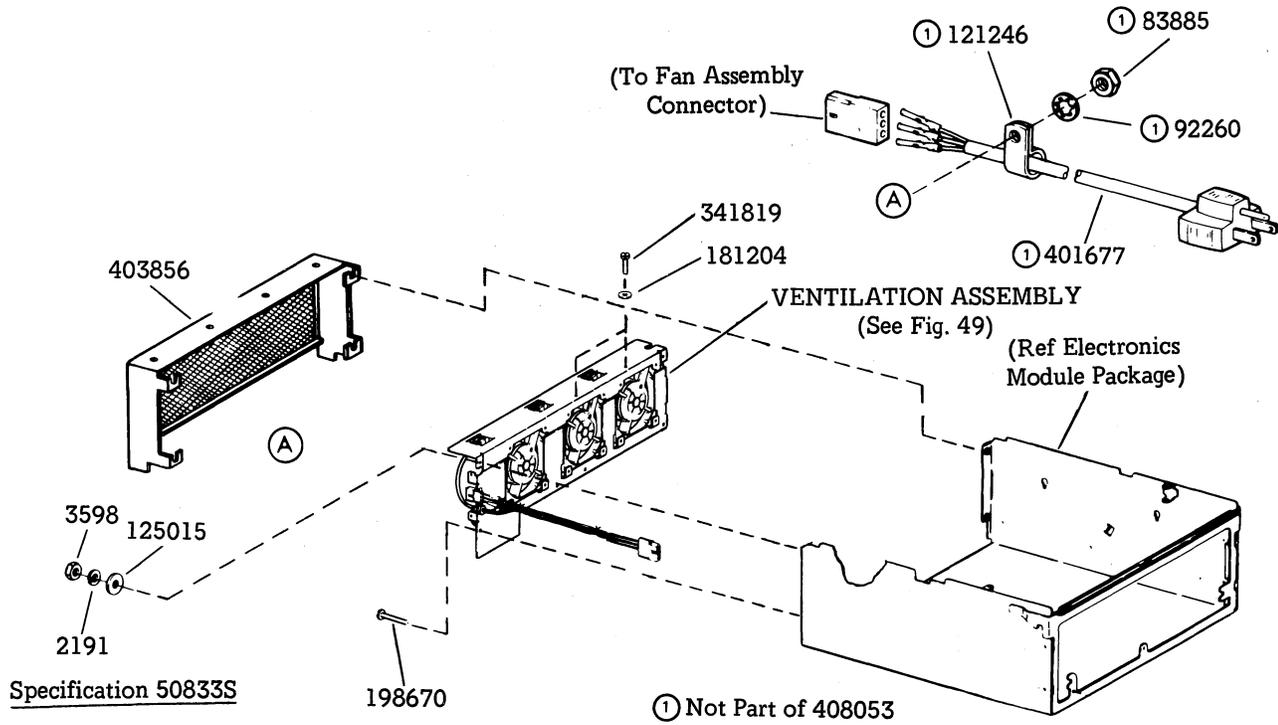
408053 Modification Kit to Provide Ventilation Assembly to 40CAB901/AF, AG (Air-flow Through Bottom) and 40CAB902/AB Cabinets
